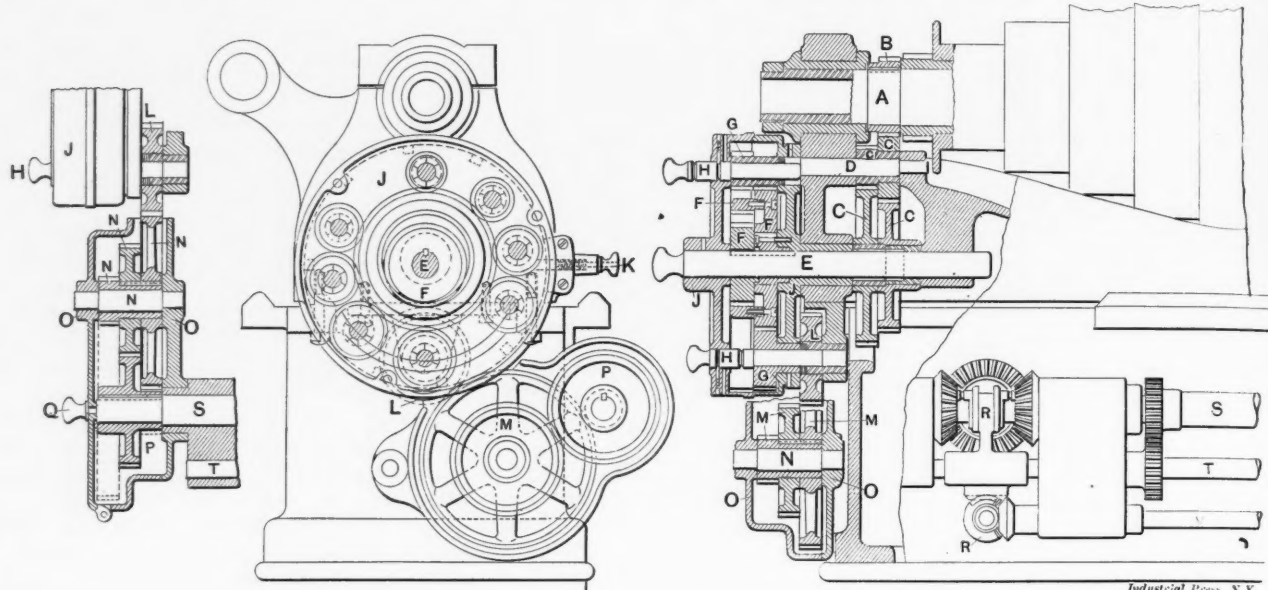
Detail of Screw-cutting Arrangement used on "Hamilton," Style "A" Lathes.
